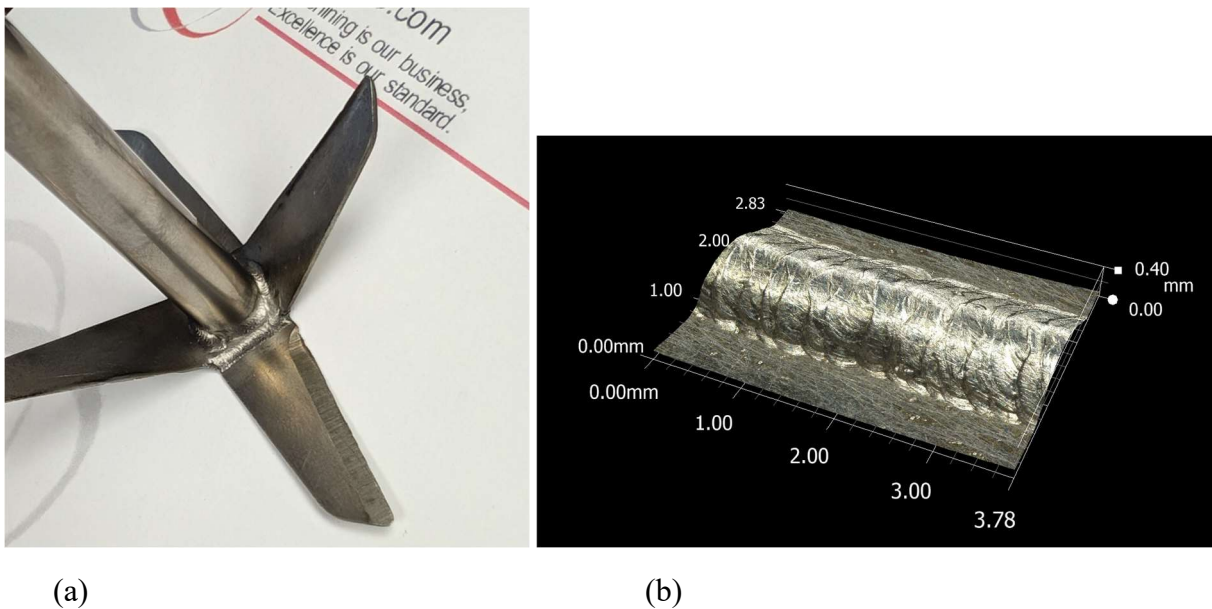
(a) Thin-walled 316L SS welded assembly fabricated using HLBW employing pulsed welding parameters with filler wire and (b) high resolution 3D scan of corresponding weld procedure qualification test coupon [courtesy of Apollo Machine, Canada].
